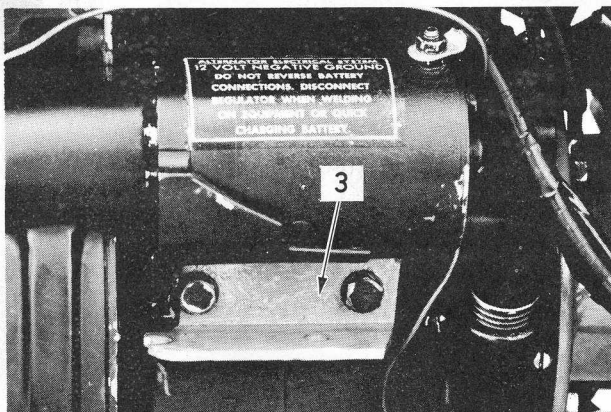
Optional PTO Valve Adaptor Bracket for Model 444 Tractor prior to S/N 9646800 Only
